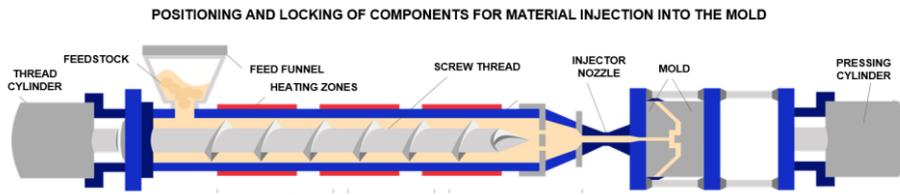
Injection Molding Process and equipment (Sulpast, 2023).
